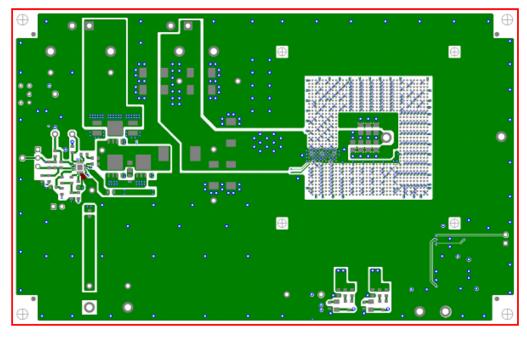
TPS51219EVM-630 Top Copper Layer (Top View)
